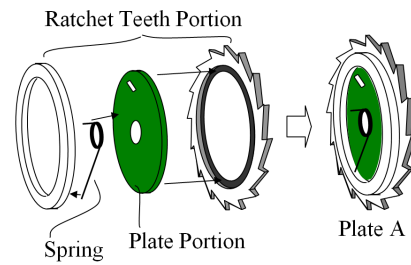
shows the structure of the safety device. Gear A, Plate B and Ratchet Wheel A are attached to the shaft of the robot arm. Claw B is attached to Plate B by Pin D. Guide Bar B attached to Claw B is inserted in Guide Hole B of Plate A. The shaft rotates Plate A via the torsion spring. One end of Linear Spring A is connected to Pin B attached to Plate C, and another end is connected to Pin A of Frame B. Plate C has Inner Teeth. Guide Bar A attached to Claw C is inserted to Guide Hole A of Plate C. Gear B meshes with Gear A. A rotary damper is connected to Gear B. Claw A is connected to the axis of the rotary damper. One end of Linear Spring B is connected to Claw A, and another end is connected to Frame A. Frame A is mounted on Frame B. Switch A which can interrupt electric power supply to all motors of the robot is installed at the position of being pressed by Pin C when Plate C is rotated. Fig.4 shows the details of Plate A. The ratchet teeth portion is connected to the plate portion via a spring.
